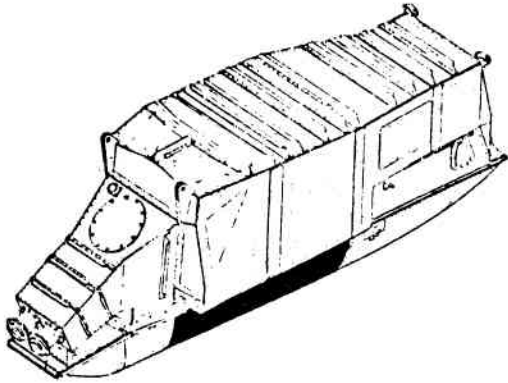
B. F-106A Gun Fairing Structure (Sheet 1 of 3)
